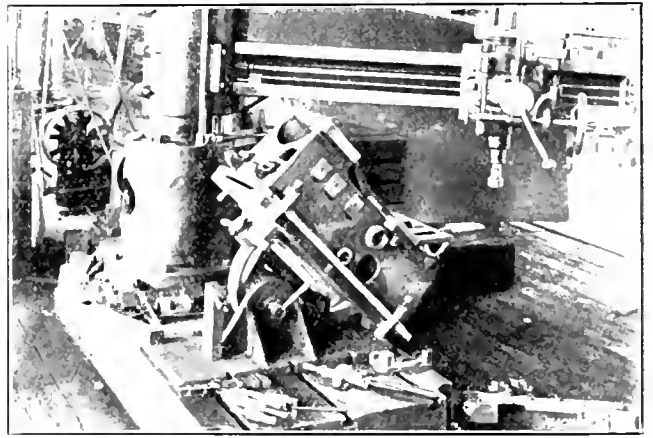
Fixture and Bed inclined for Drilling Bearing-cap Holes
